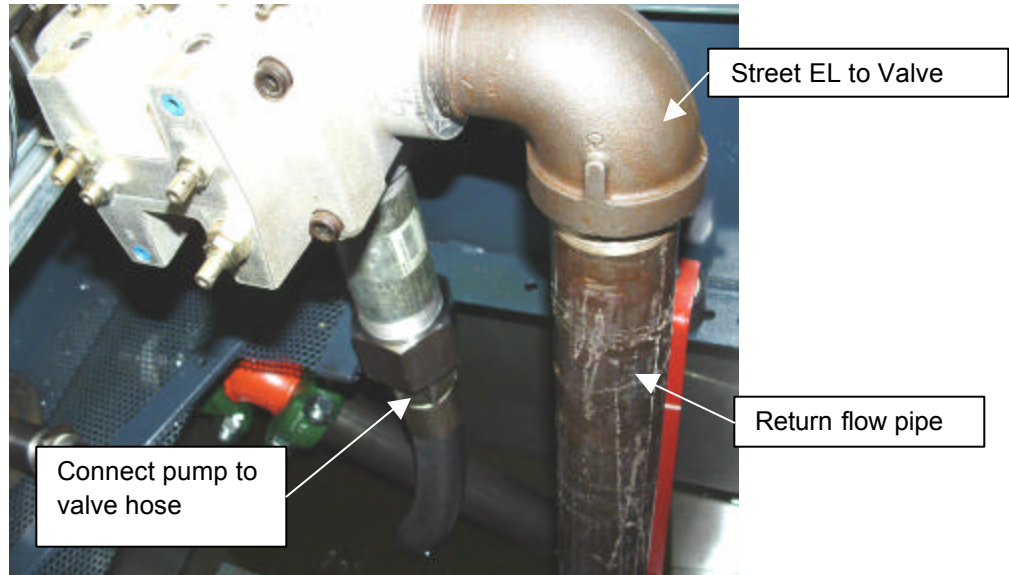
Install Tank Return pipe and Pump to Valve hose
